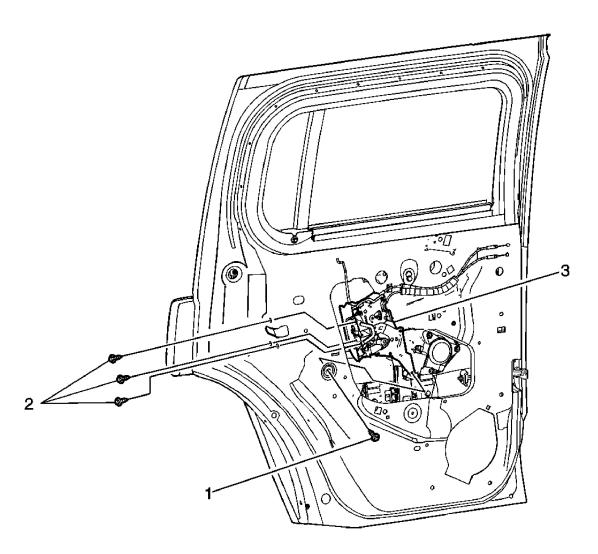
Lock Replacement - Rear Door Courtesy of GENERAL MOTORS CORP.
